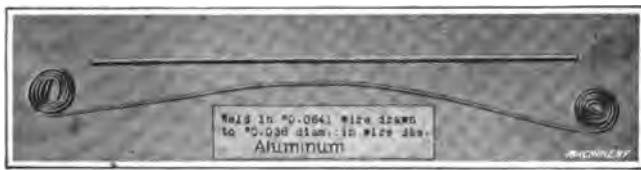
Sample of Aluminum Wire welded and drawn through Die without Disintegration at Joint
